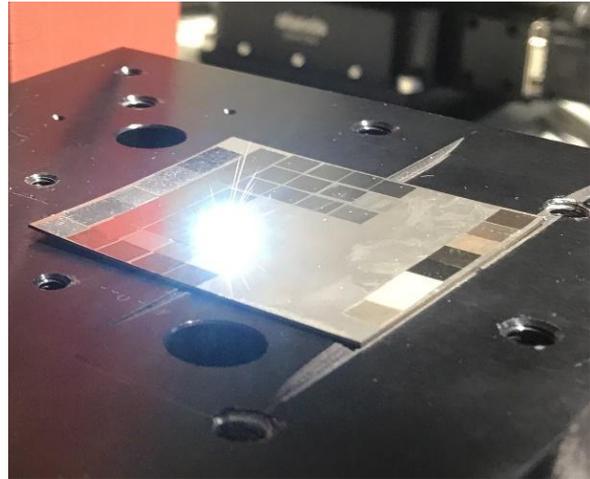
Laser processing of AISI 316L stainless steel blank piece.
